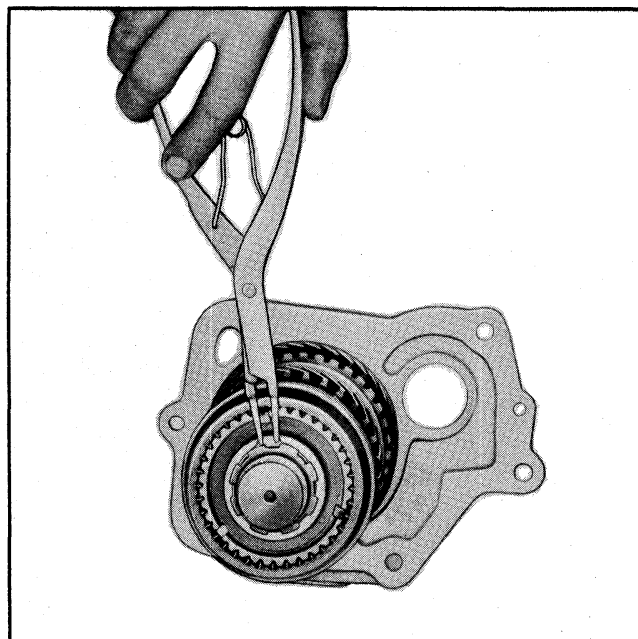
A-20 Removing or Replacing Mainshaft Front Snap Ring
